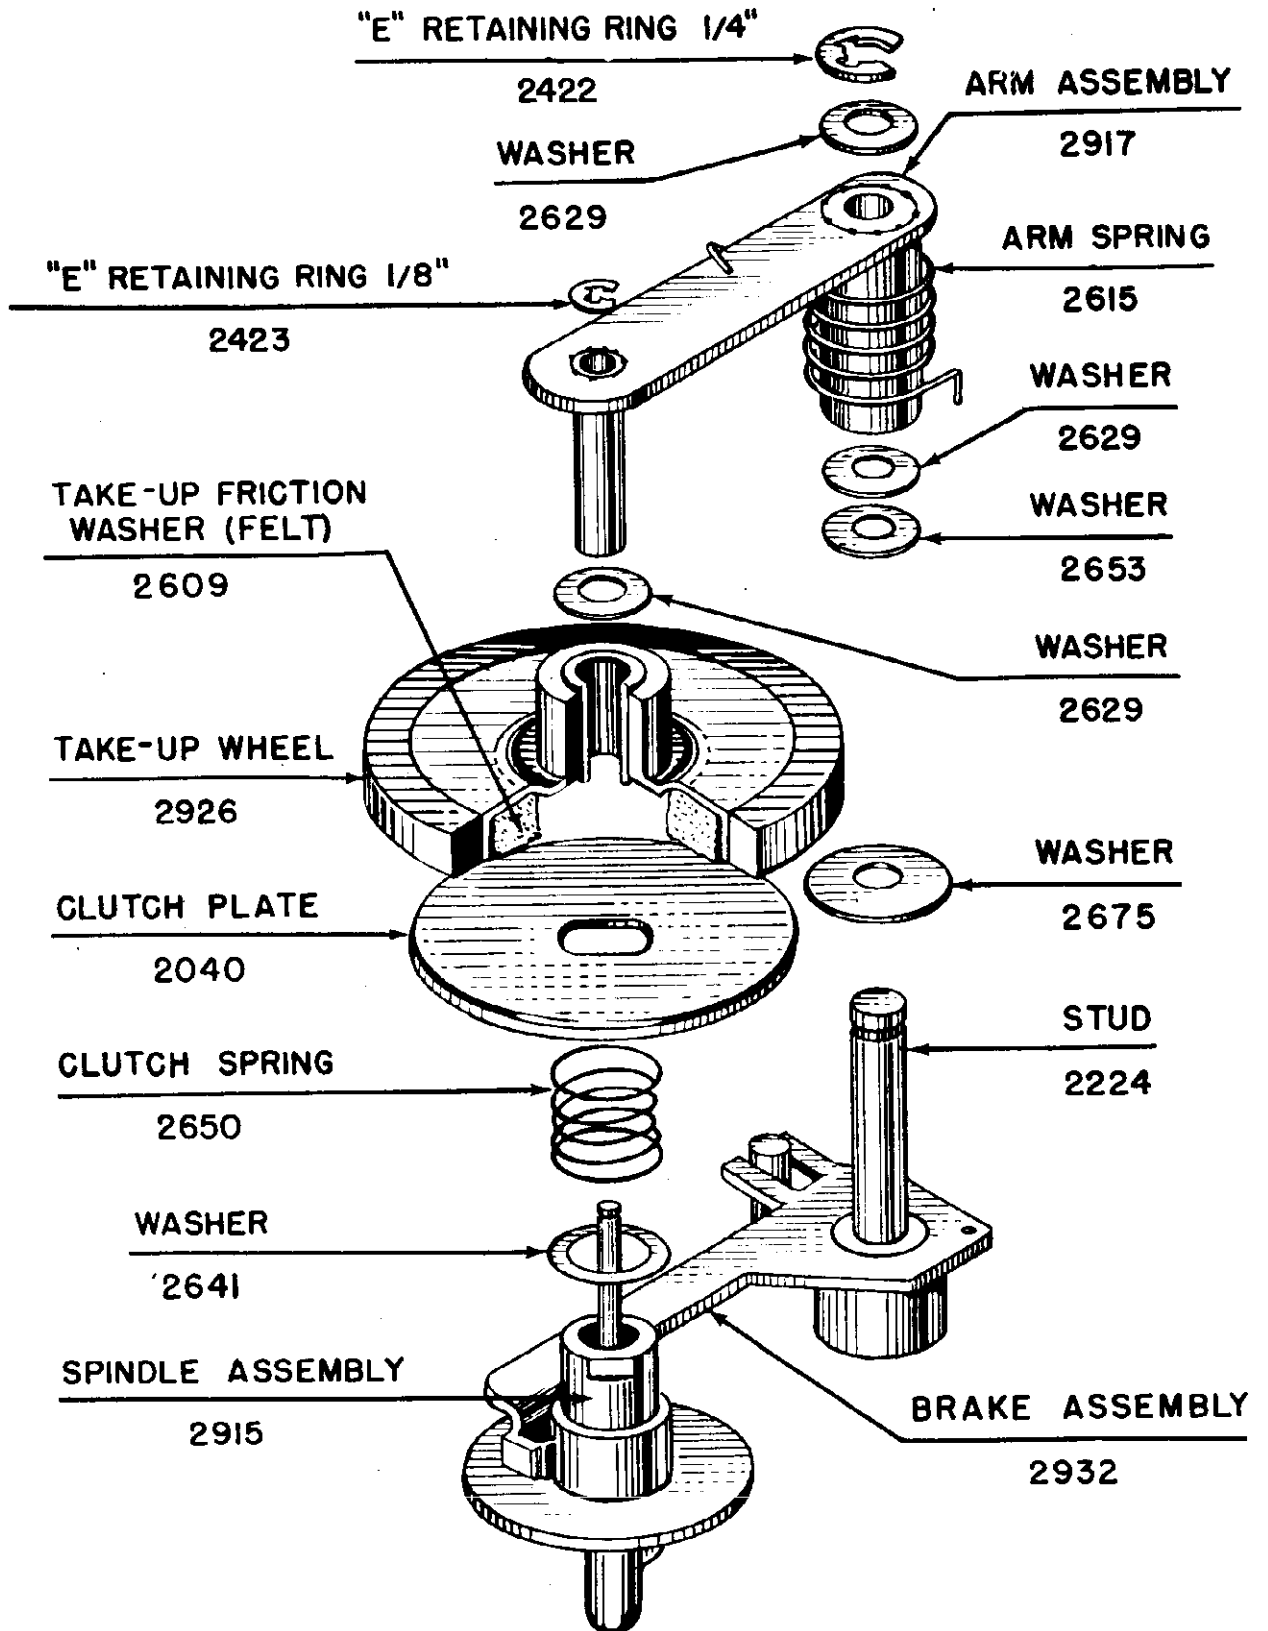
Exploded View, Takeup Spindle Assembly.
